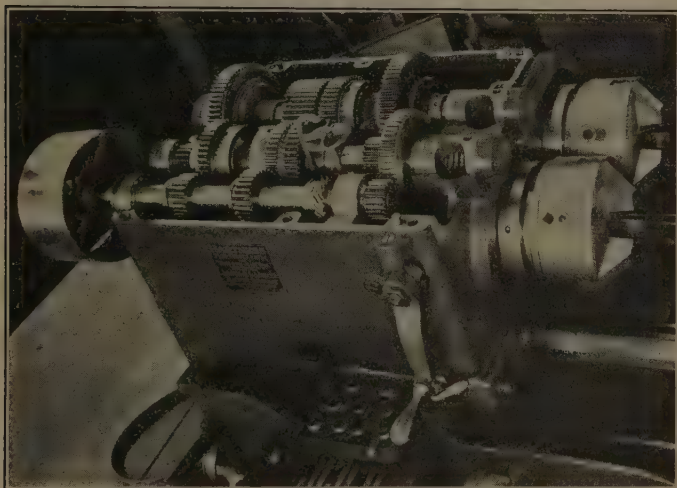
HEADSTOCK OF DOUBLE-SPINDLE FLAT TURRET LATHE
